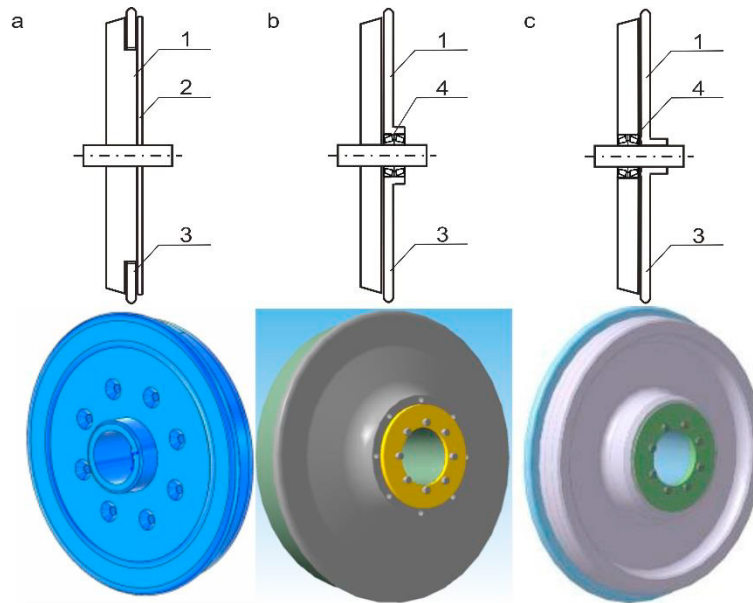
Proposed design solutions and 3D- models of the wheels: 1 – wheel center; 2 – pressing disk; 3 – flange; 4 – bearing.
